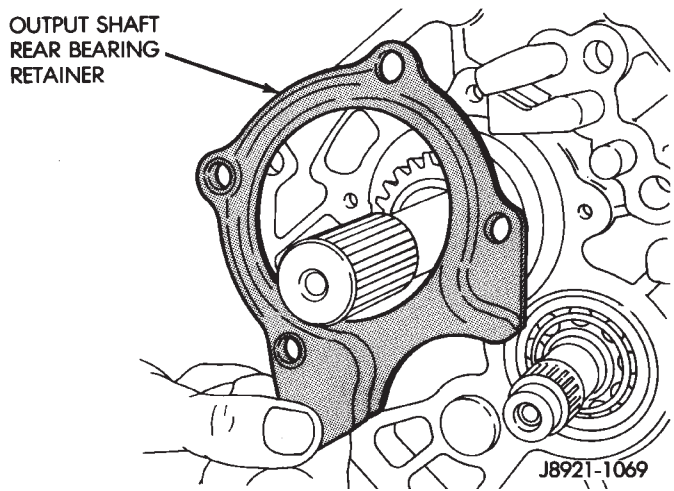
Removing Output Shaft Rear Bearing Retainer
